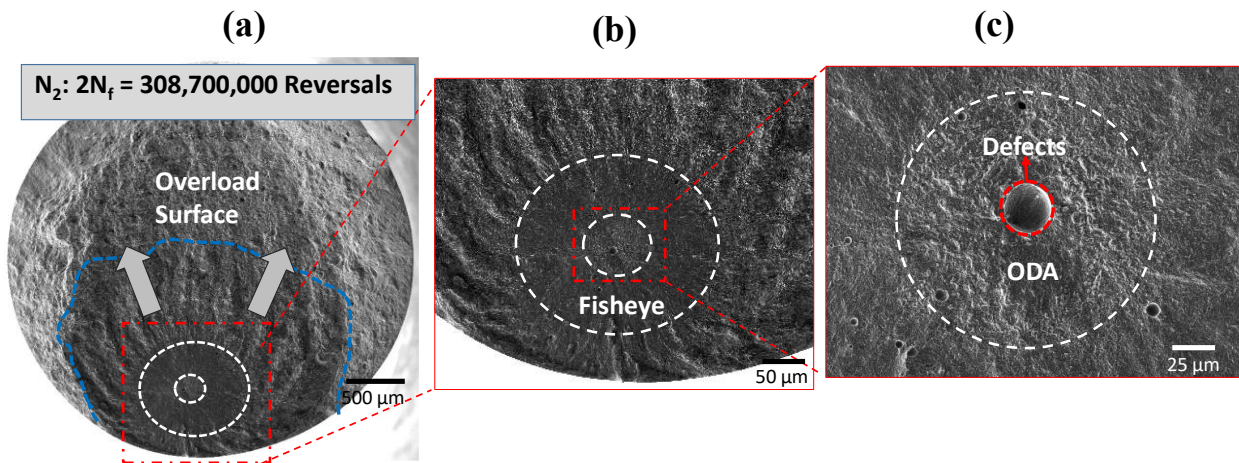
(a) Fatigue fracture surfaces of L-PBF 17-4 PH SS specimens tested at 475 MPa with 308,700,000 reversals to failure, (b) magnification of the fisheye, and (c) magnification of the ODA.
